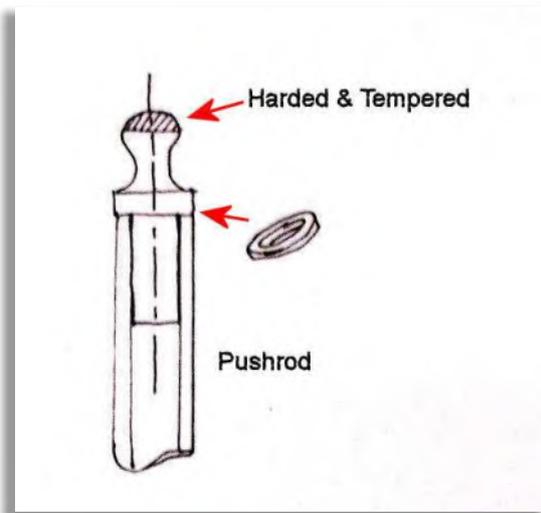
Drawing of the pushrod and the packing ring. The ball ended insert is soft soldered into position. A packing ring out of silver steel can be inserted to adjust the pus rod length. The ring and the ball section (indicated) should be hardened and tempered. Courtesy Chris Odling.
